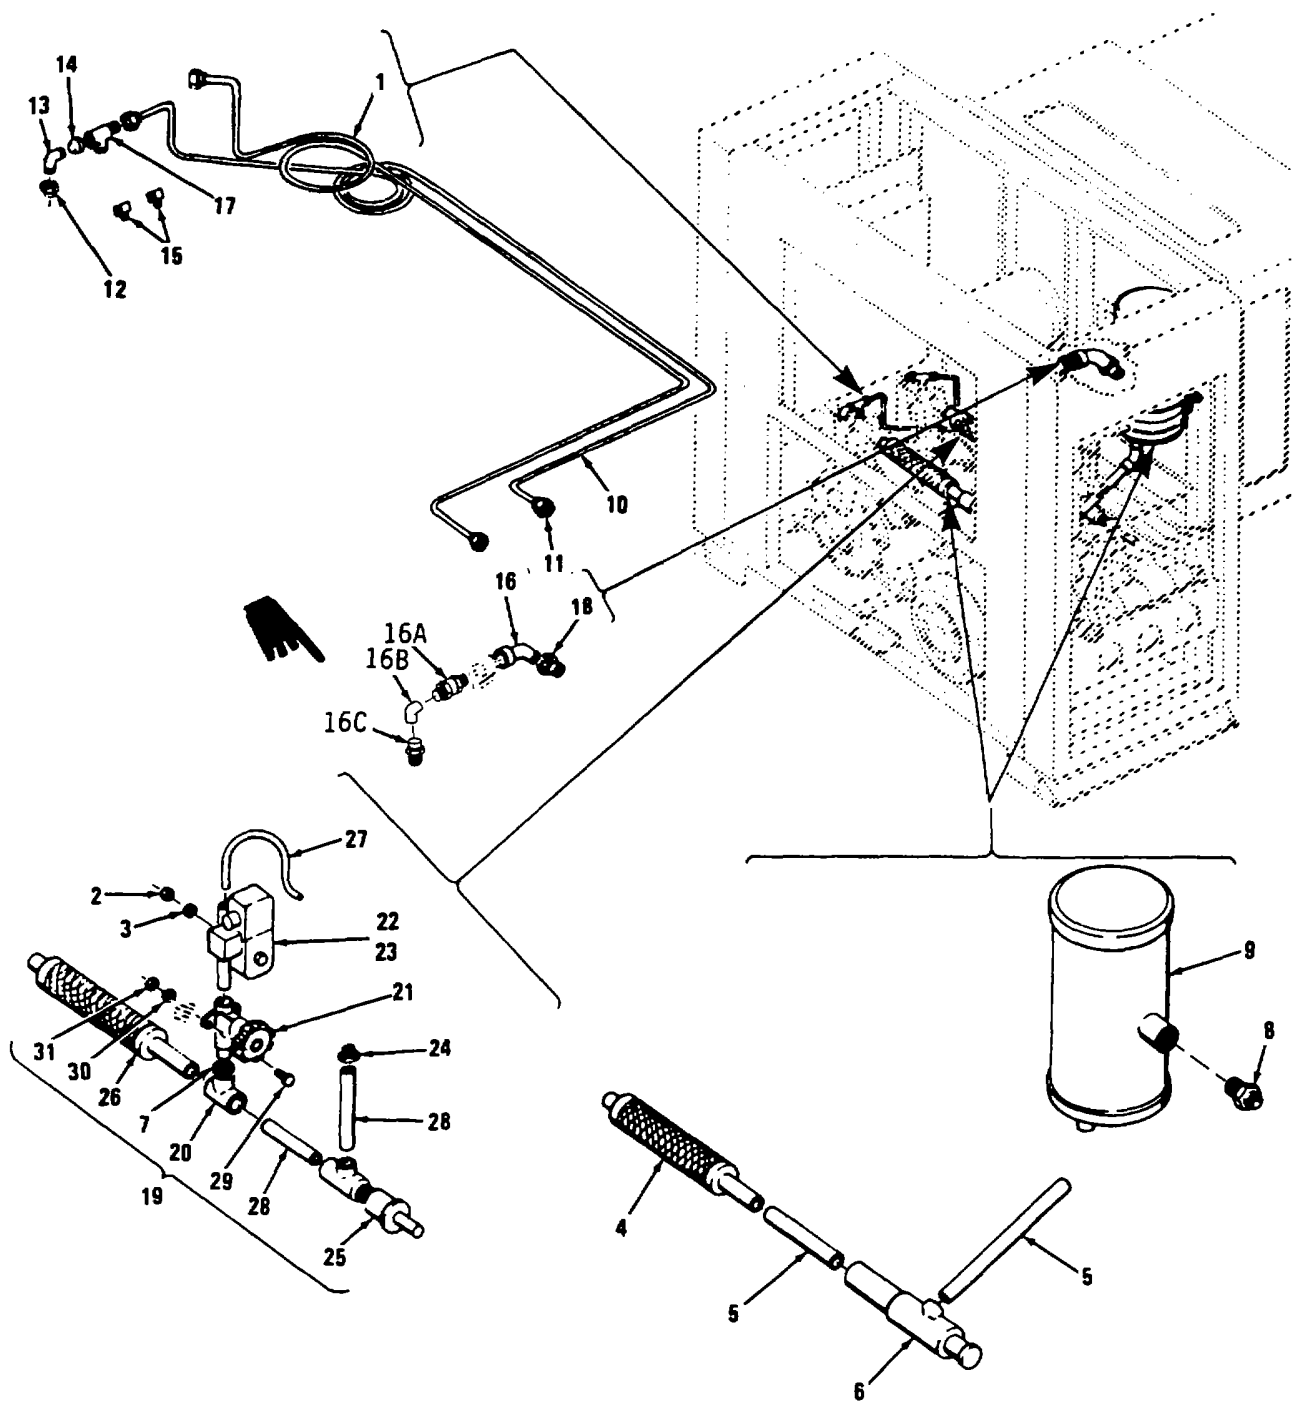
Accumulator Pipe Assembly, Discharge Line Assembly, and Gage Lines
